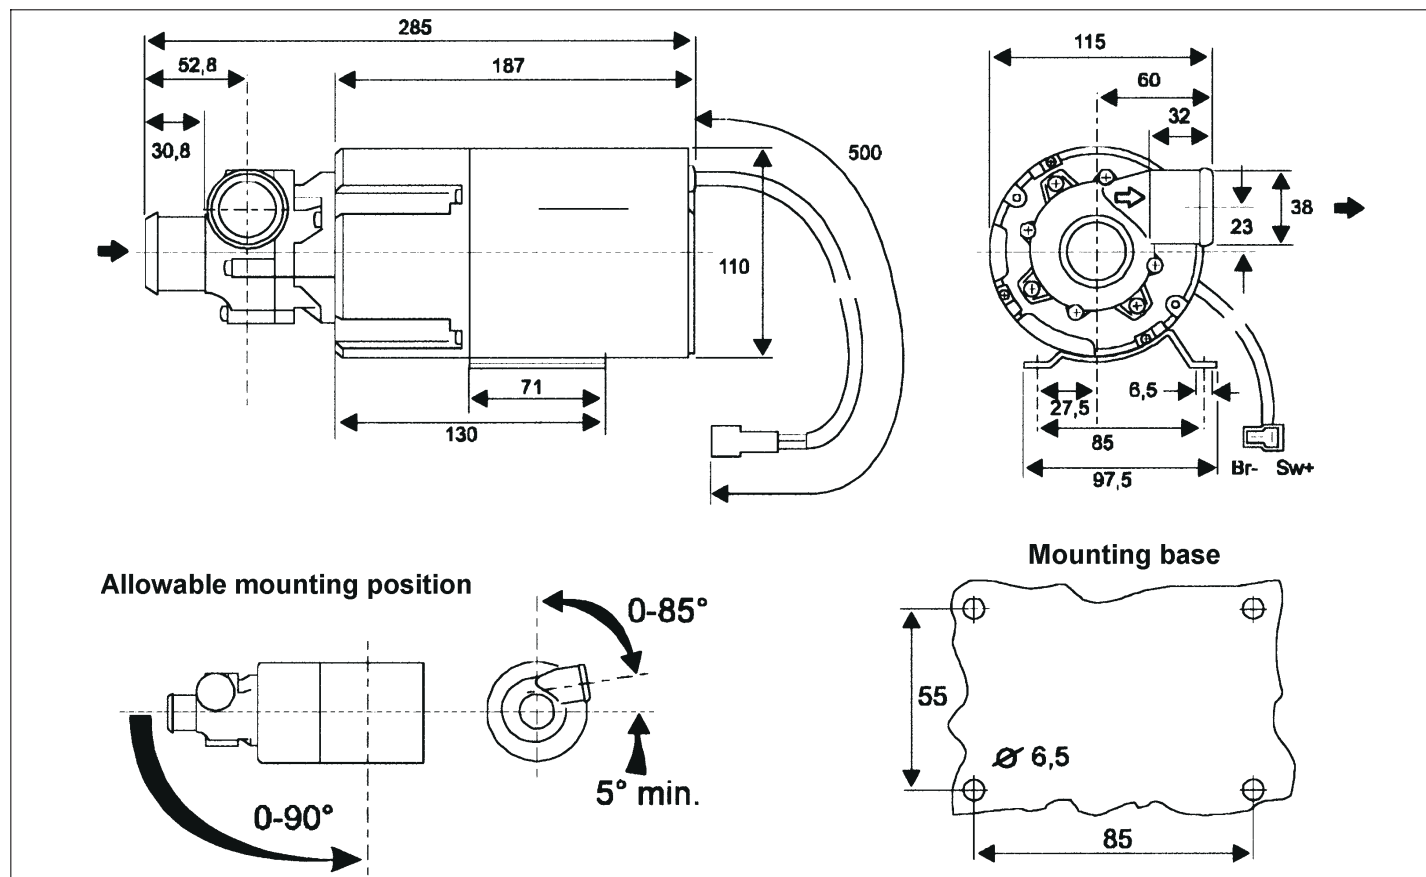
Coolant Circulating Pump Assembly - U 4851
